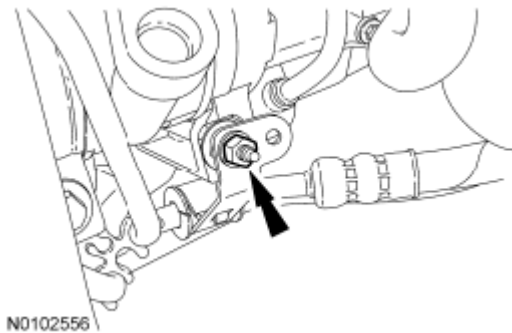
Locating A/C Compressor Stud Bolt And Nut
